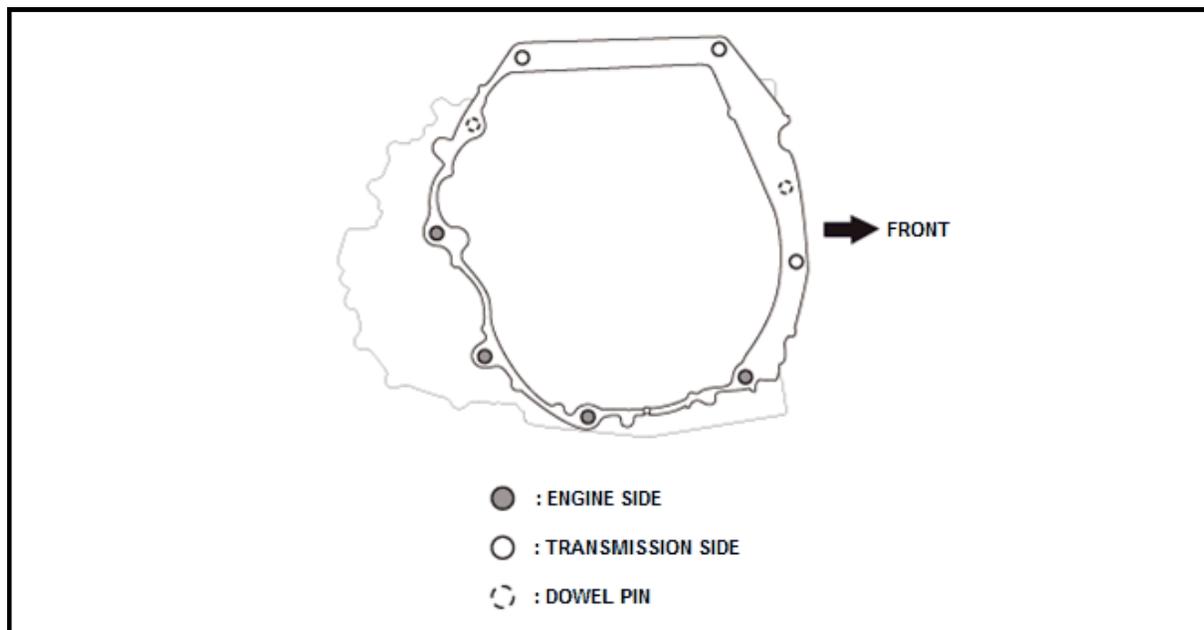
Exploded View Of Transmission Assembly Mounting Bolt With Torque Specifications
